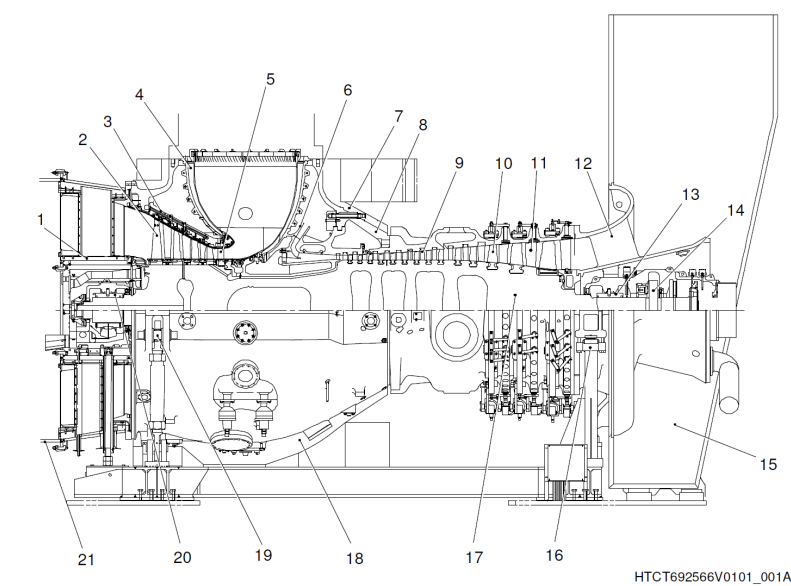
Major Sections of the MS-7001 Gas Turbine Assembly.
